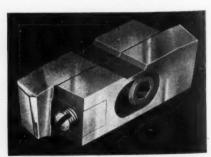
Cutter Blades for Bar Shown in Fig. 1
